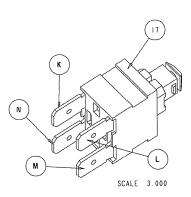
Isometric Drawing Gas Module 3 Interface Connectors
